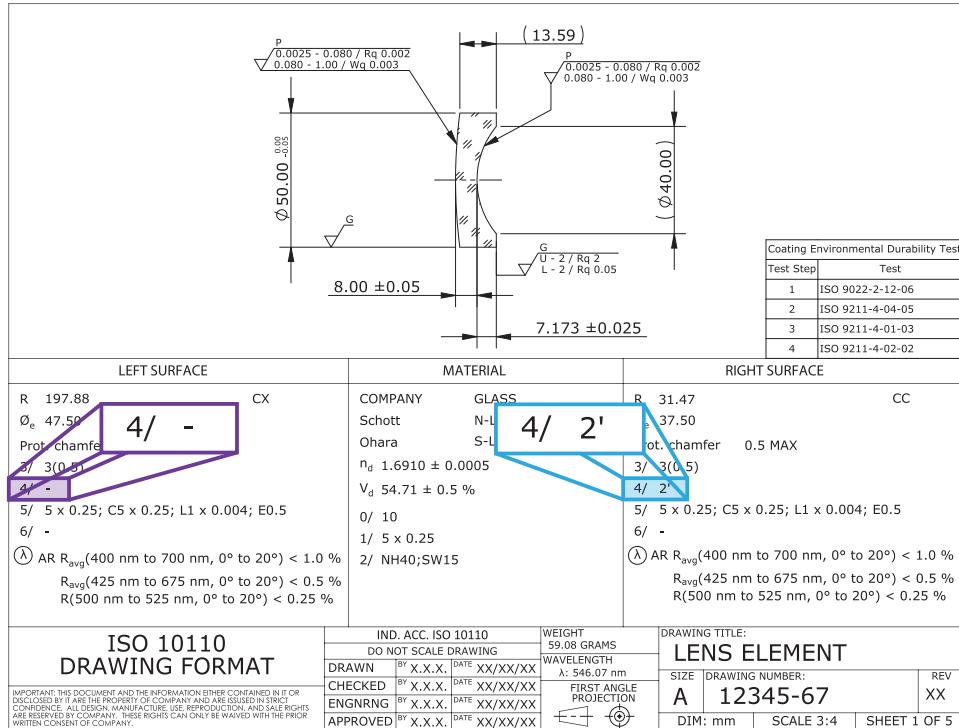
Example of spherical optical element ISO 10110 drawing, highlighting centering tolerances.
